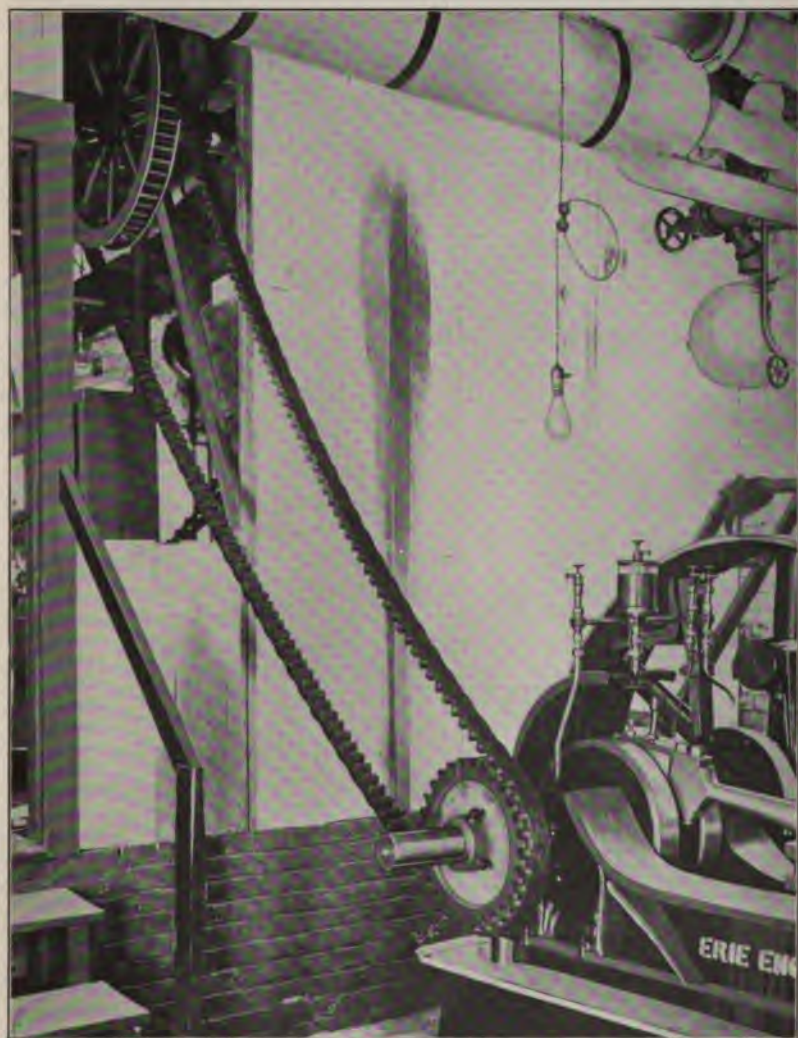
A SILENT CHAIN DRIVE FROM ENGINE TO LINE SHAFT.
